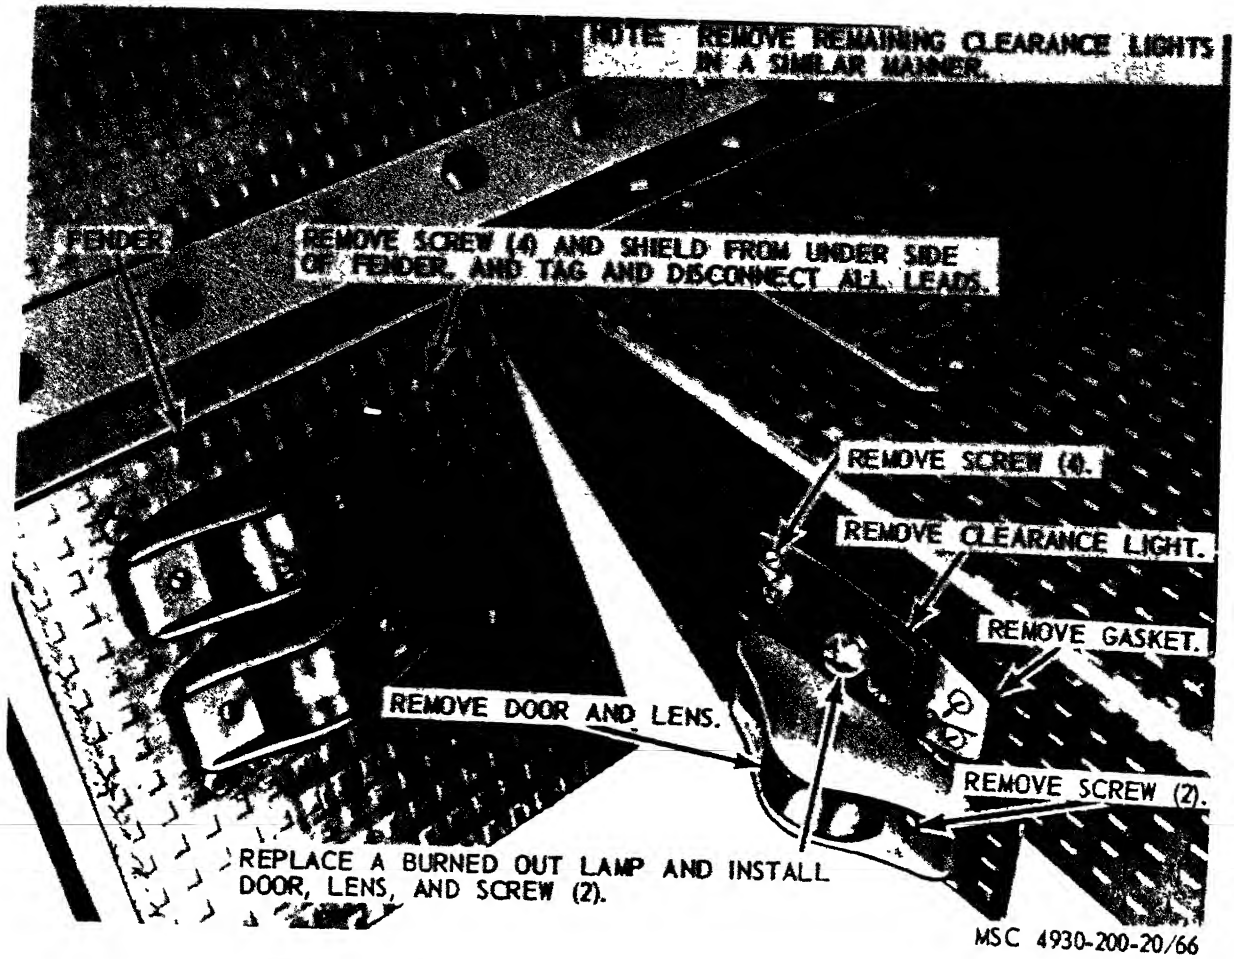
Trailer clearance lights and lamps, removal and installation
